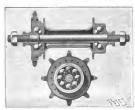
BICYCLE BUB WITH BALL BEARINGS.
